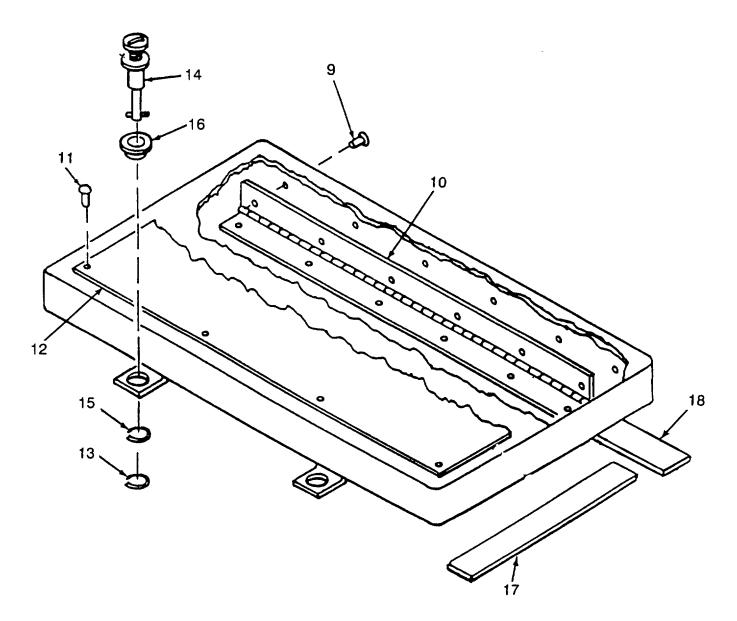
Control Box Disassembly (Sheet 2 of 2)
